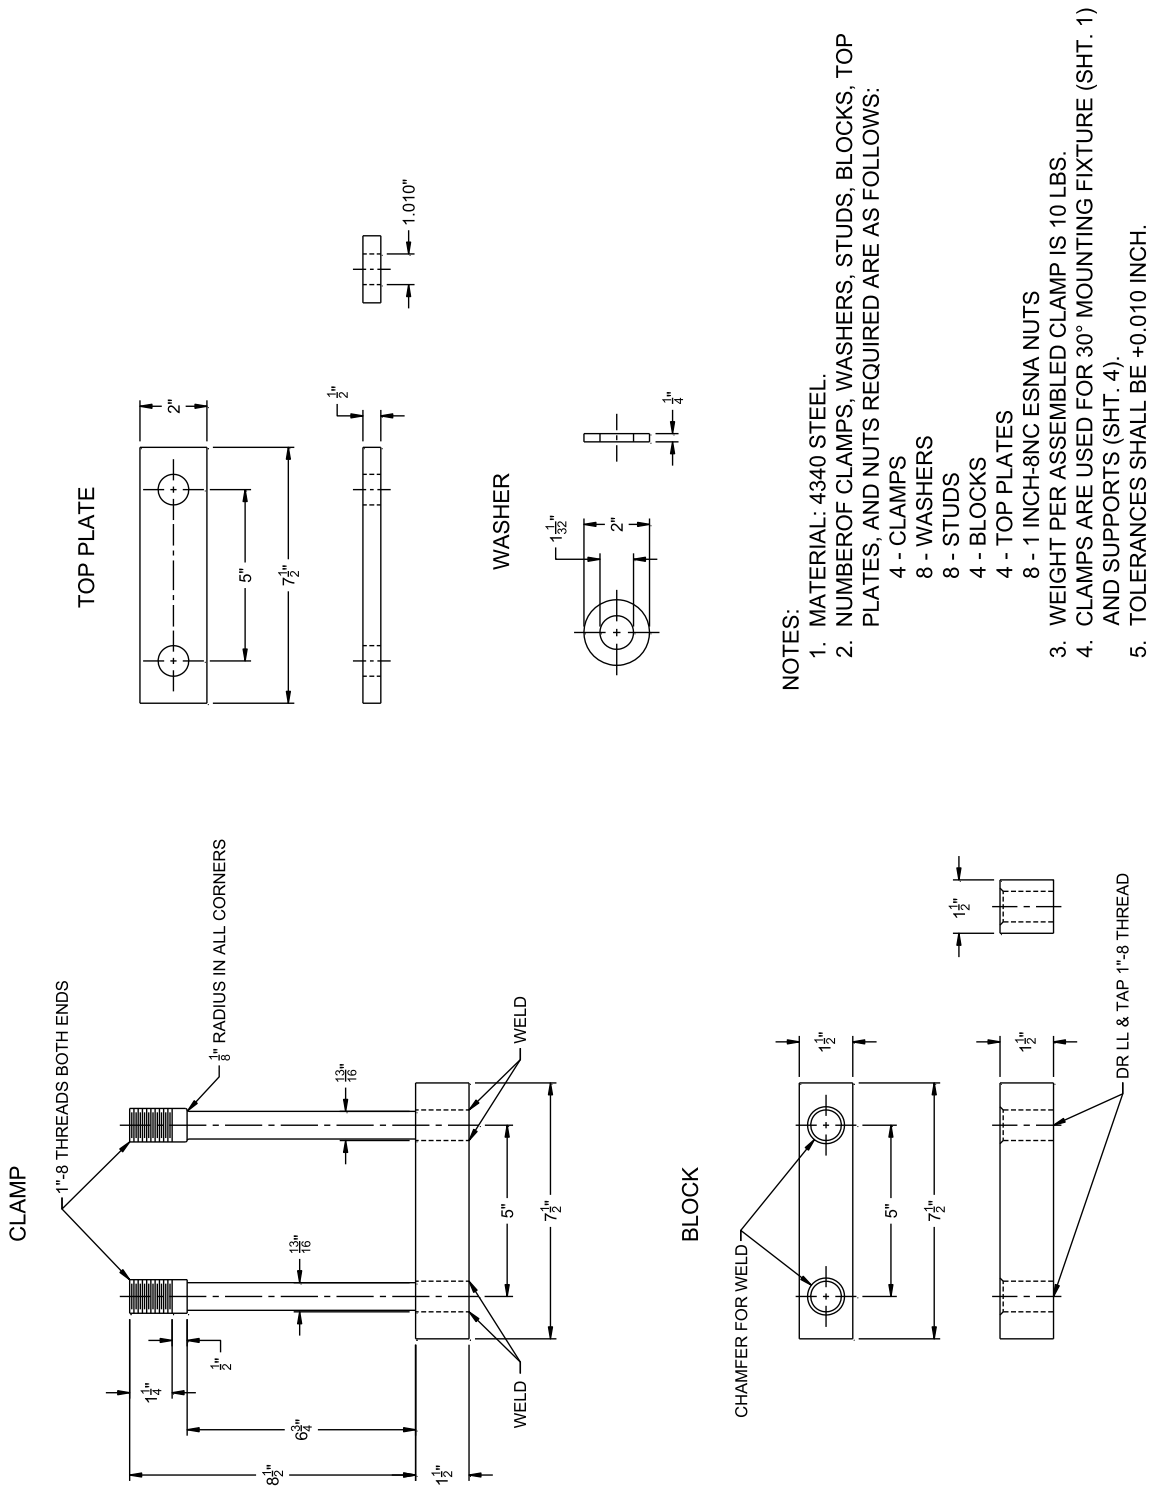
30-degree mounting fixture for testing back mounted equipment on the MWSM. (Sheet 5 of 5)
